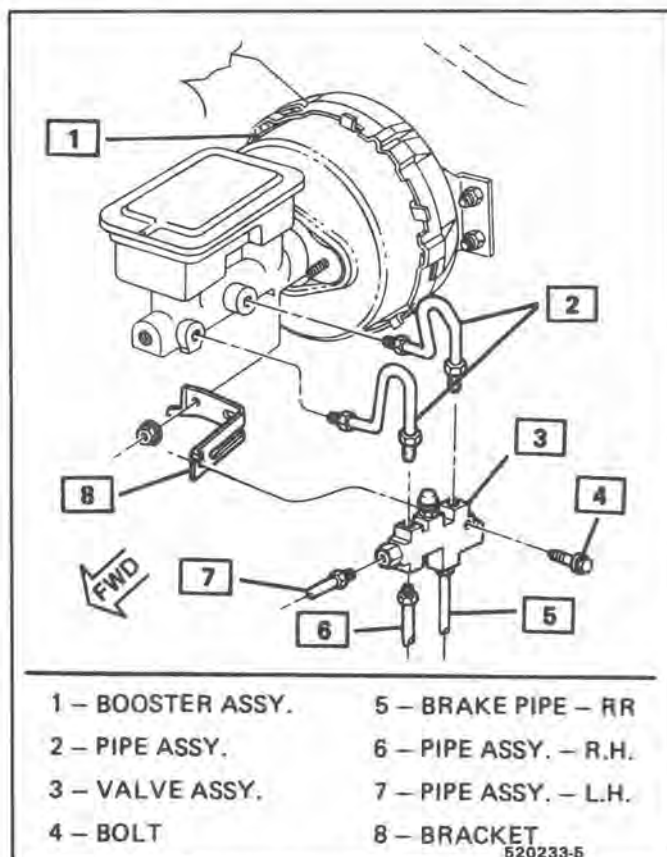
Combination Valve to Master Cylinder Mounting
